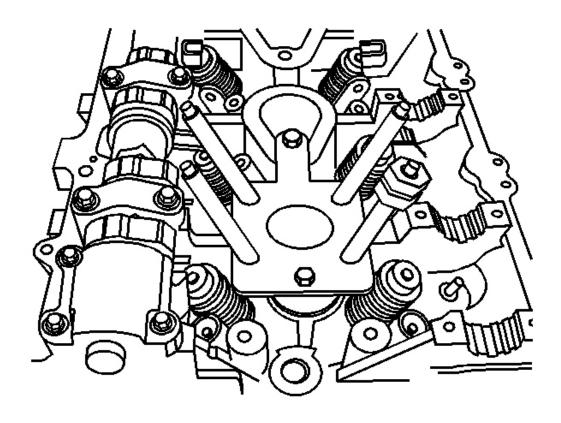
View Of J 44228 Base Plate Courtesy of GENERAL MOTORS CORP.
